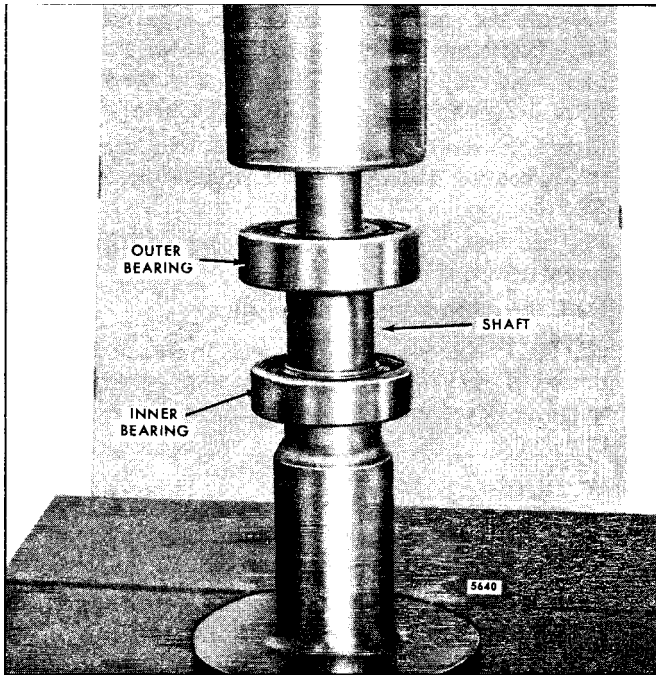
Pressing Bearing on Pump Shaft using Tool J 25257
